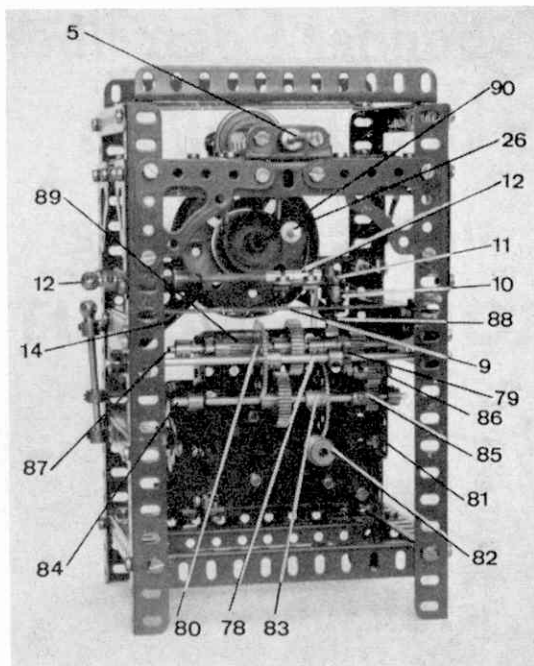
The Motor and gearing, in their framework, removed from the remainder of the Lathe.
